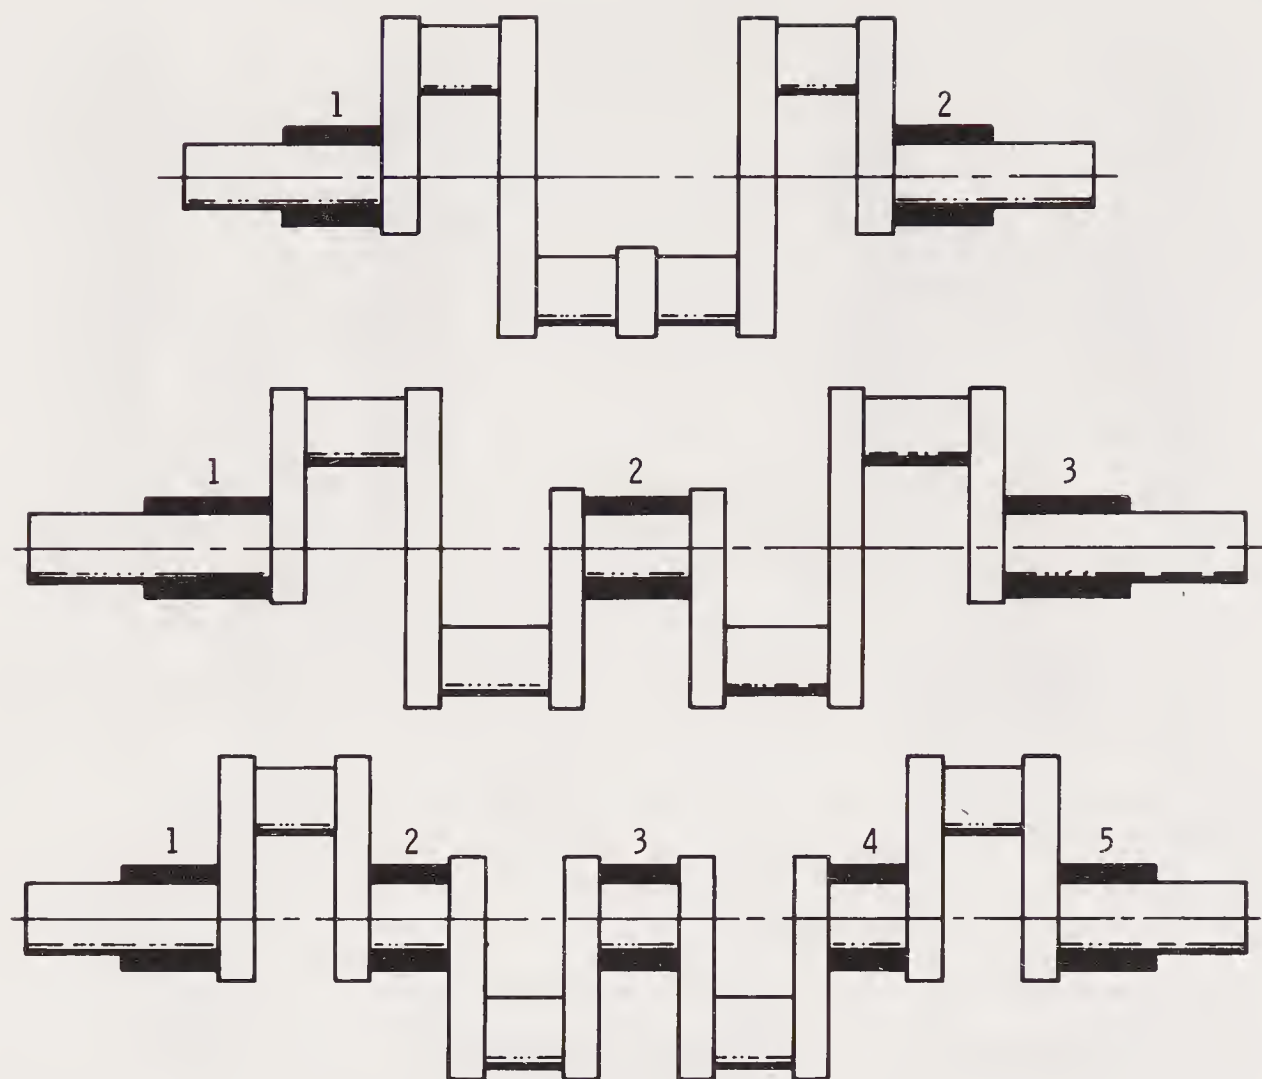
Four-throw crankshafts illustrating two, three and five main bearings.
